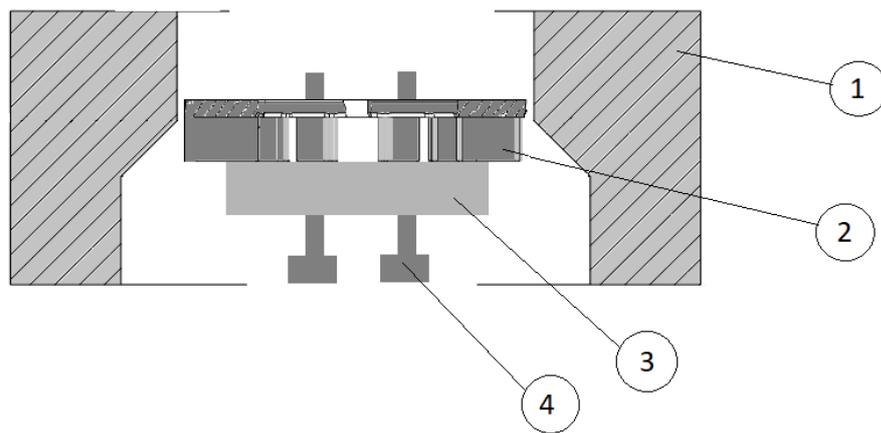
1: Aluminum housing/crimp test fixture, 2: Stator, 3: Block, 4: Screws.
